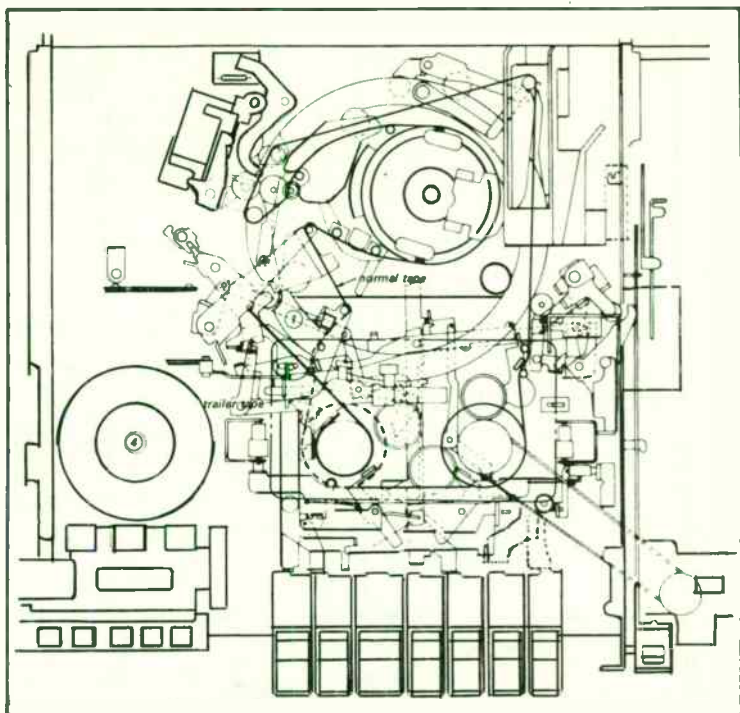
Tape sensing mechanism and machine shut-off.
